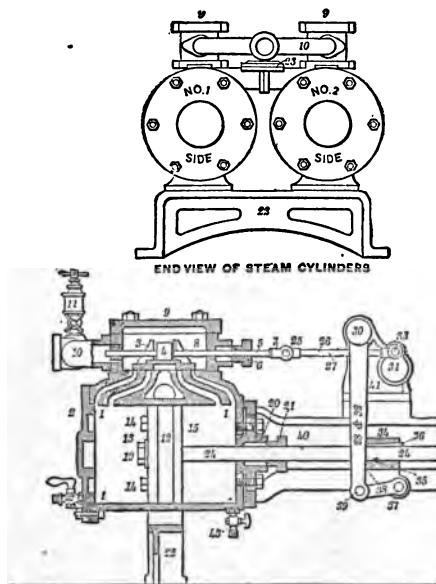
WORTHINGTON STEAM END, SHOWING DETAILS.
